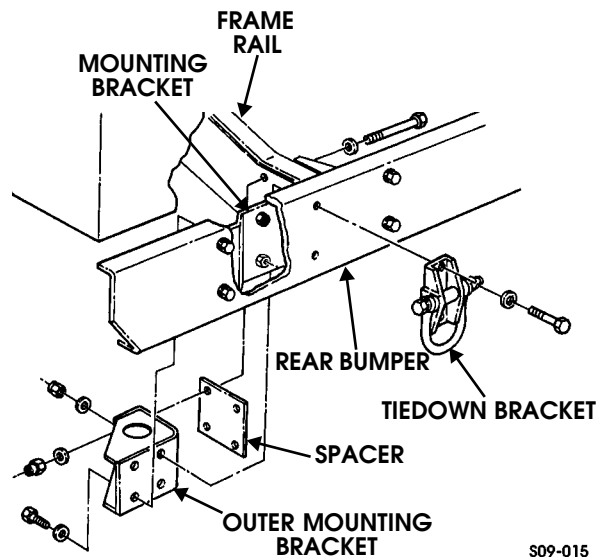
Rear Bumper Mounting Bracket Replacement
